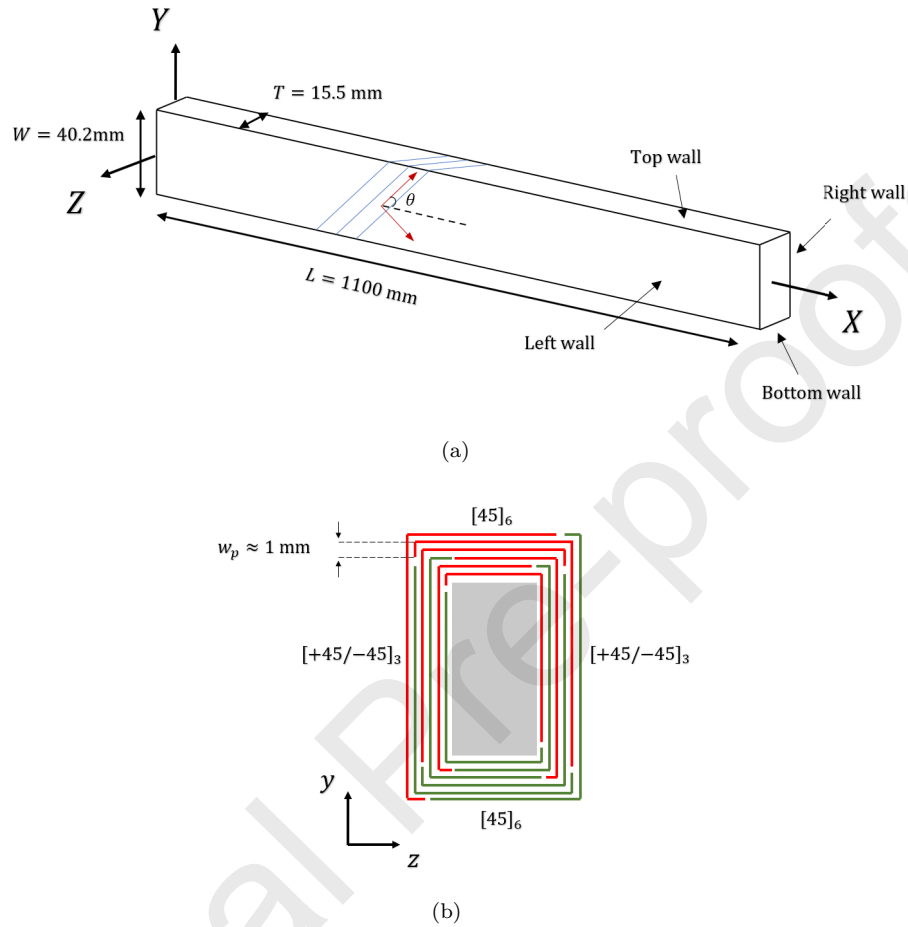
Schematic drawing of the specimen (a) geometry (b) layup configuration.
